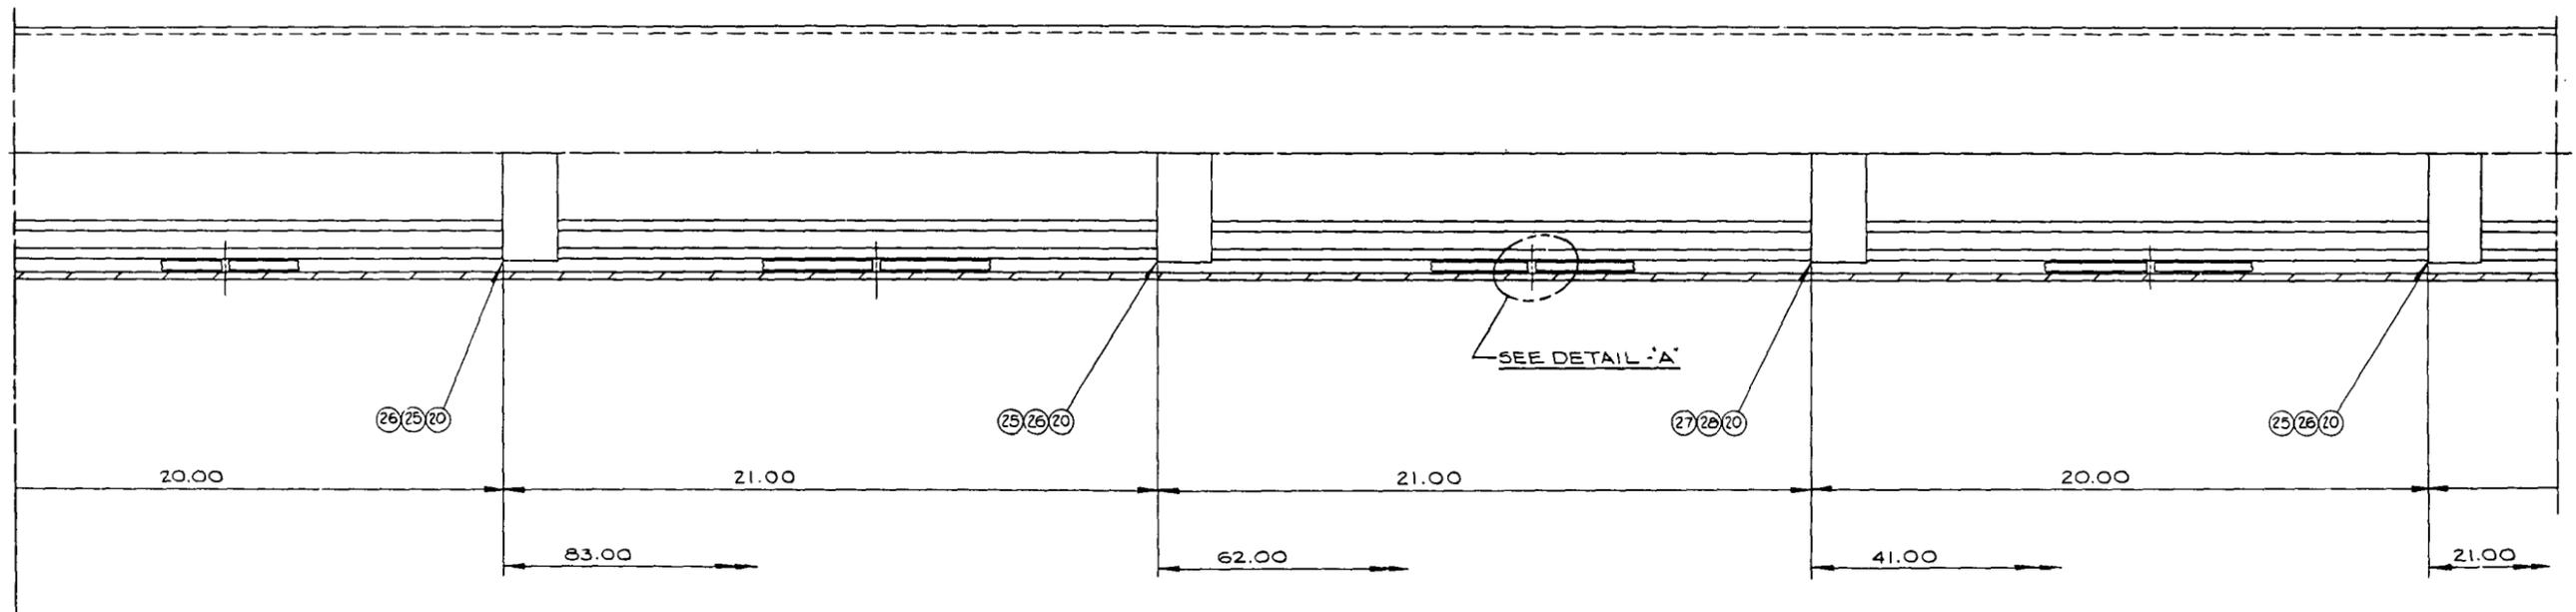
FLECHT SEASET Natural Circulation Test Section Assembly (sheet 3 of 4)
